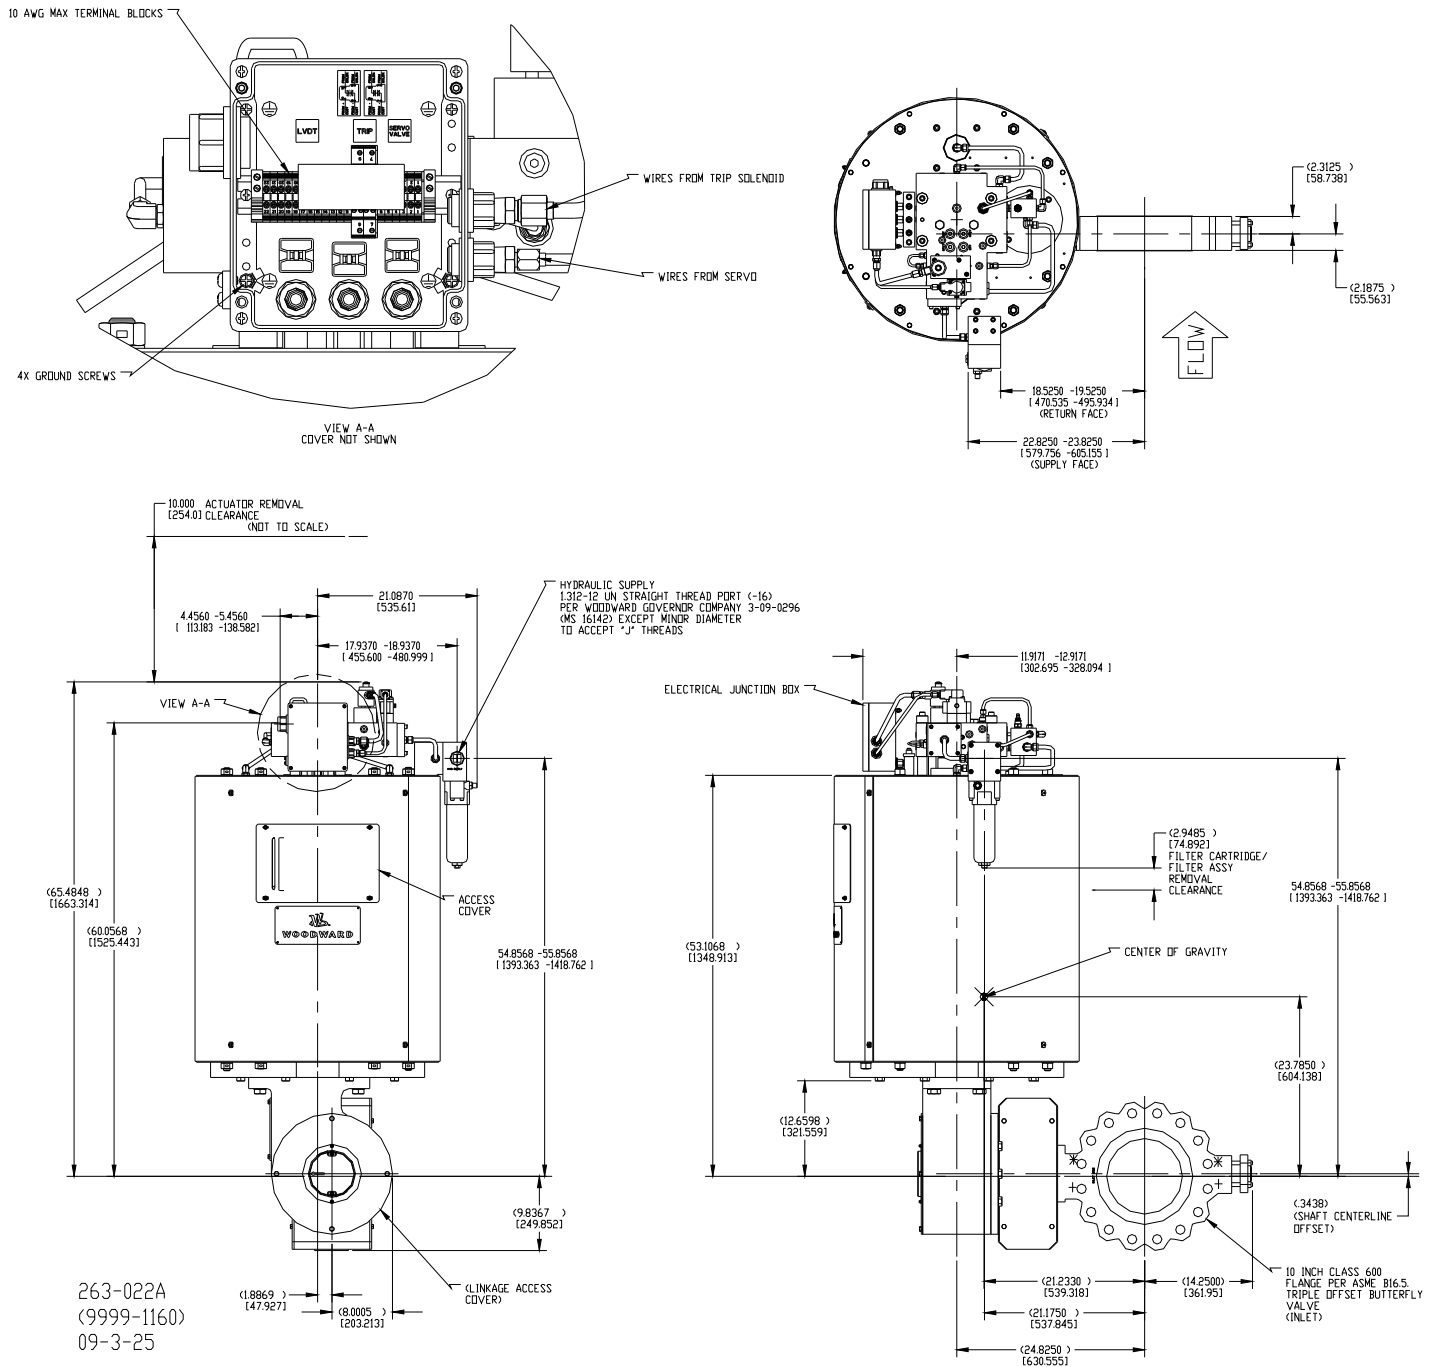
Outline Drawing, 10" valve (9904-914, -915)
